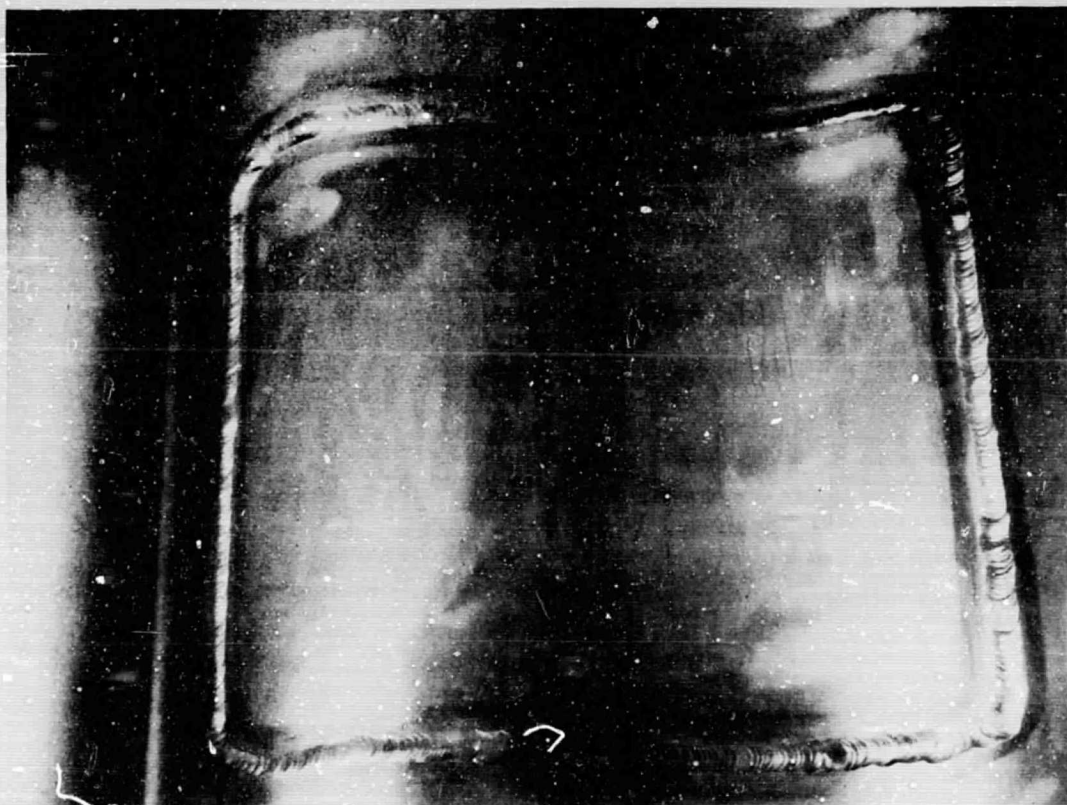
COMPLETELY WELDED REPAIR PANEL NUMBER 1
